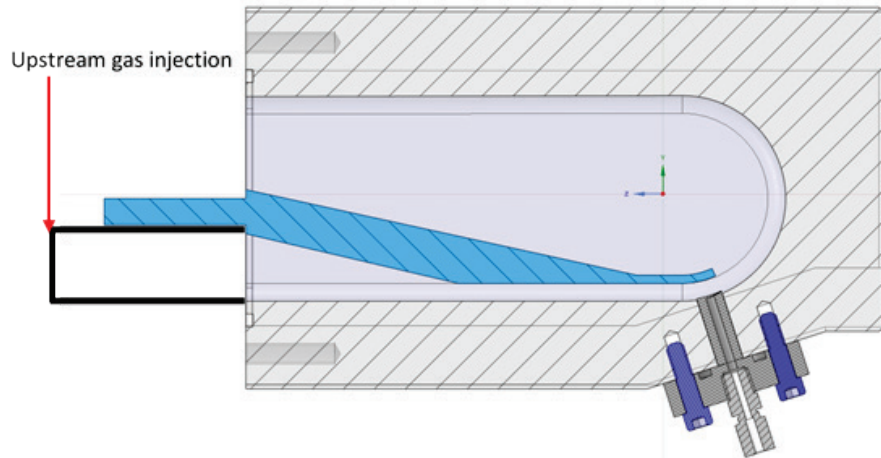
Right cross-sectional view of gas wall layer experiments (G-WaLE).
